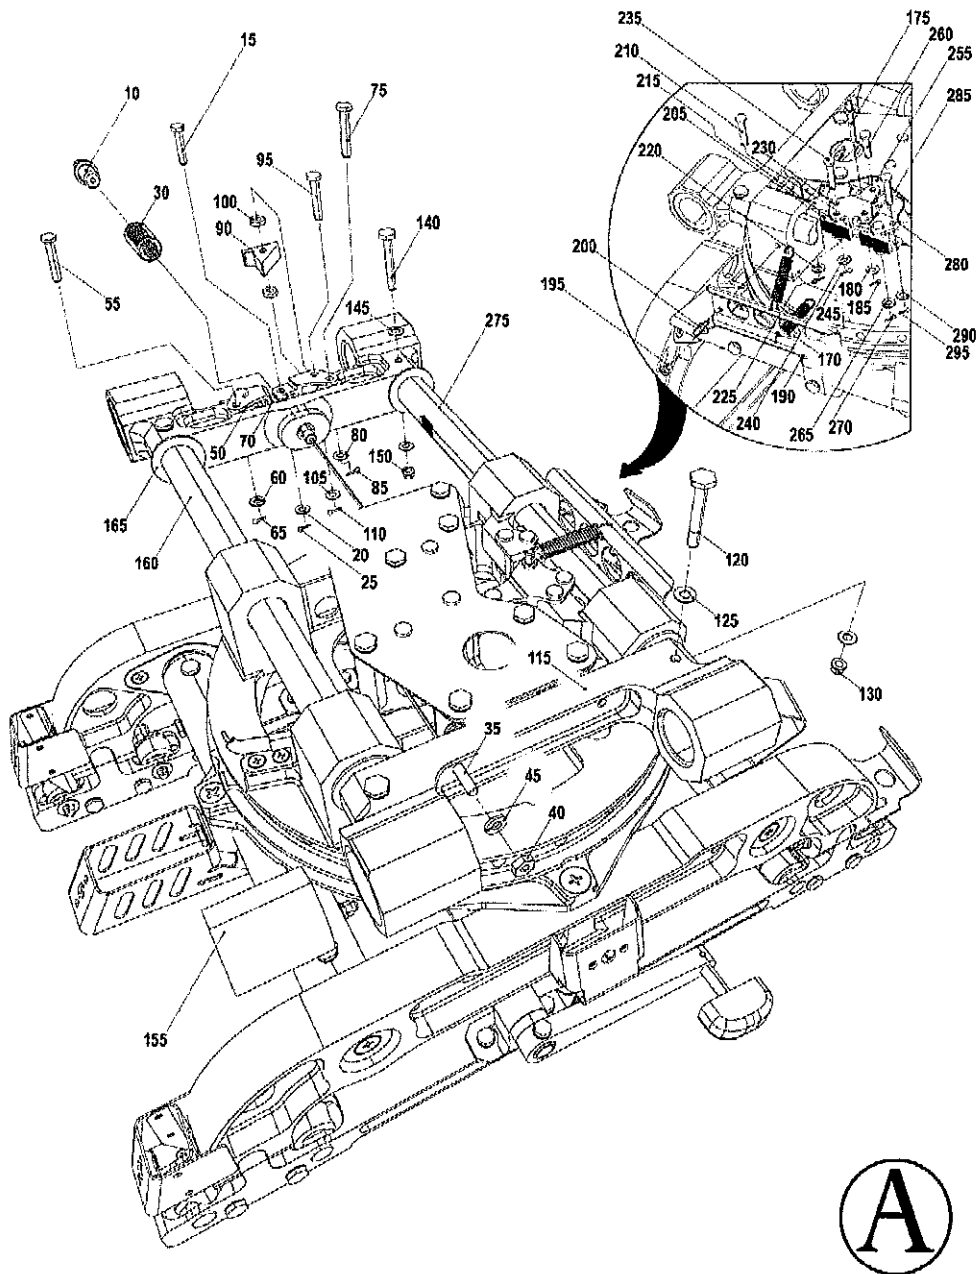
SHEET 2 BASE TURNTABLE AND MECHANISM ASSEMBLY
